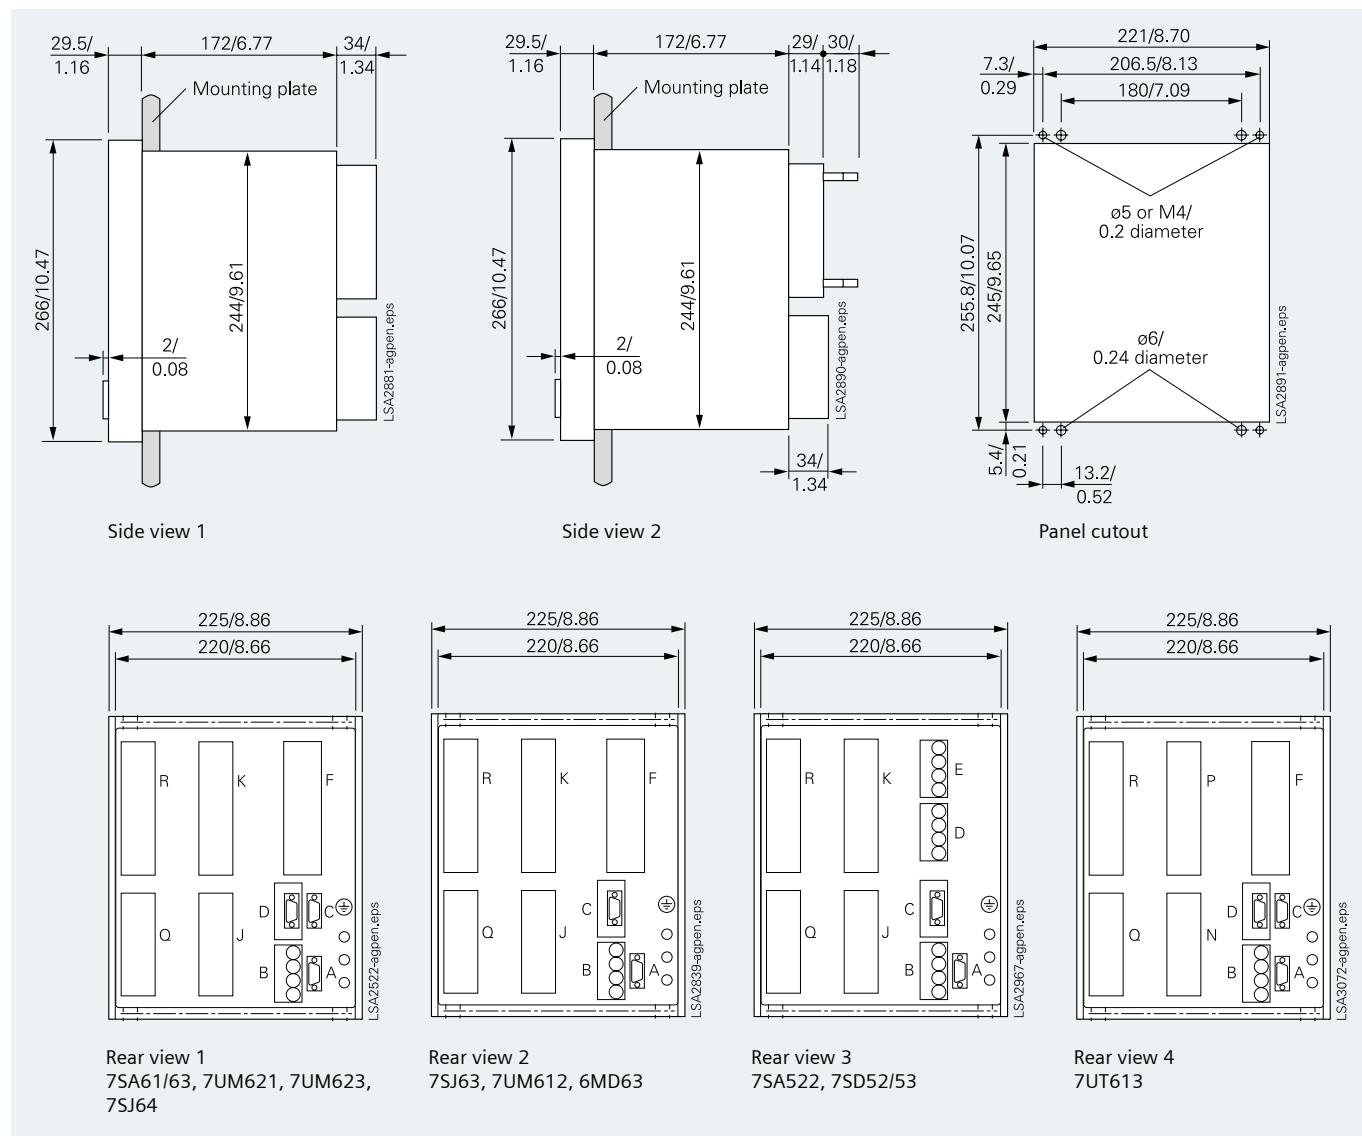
/19  $\frac{1}{2} \times 19$ " flush-mounting housing
